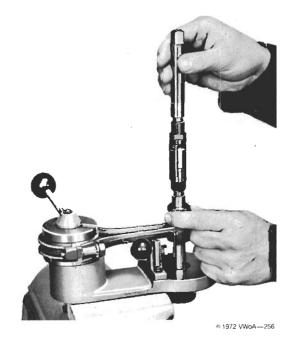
New bushing being reamed. Afterward, using the piston pin, recheck rod alignment.
